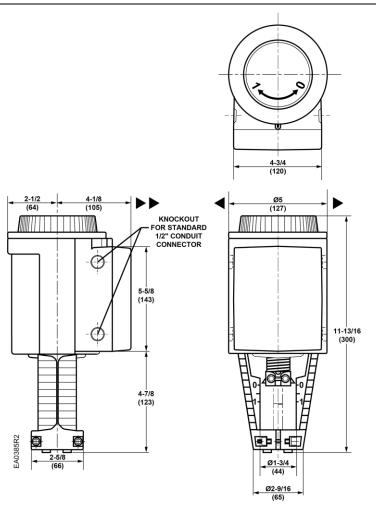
Dimensions of 599-10071 Weather Shield in Inches (Millimeters).
